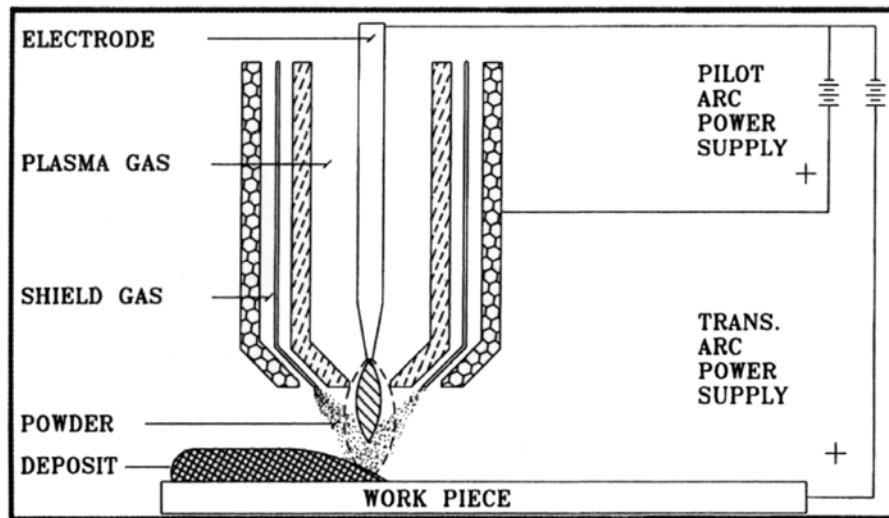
The plasma torch of the PTA welding unit (Raghu *et al.*, 1996)
